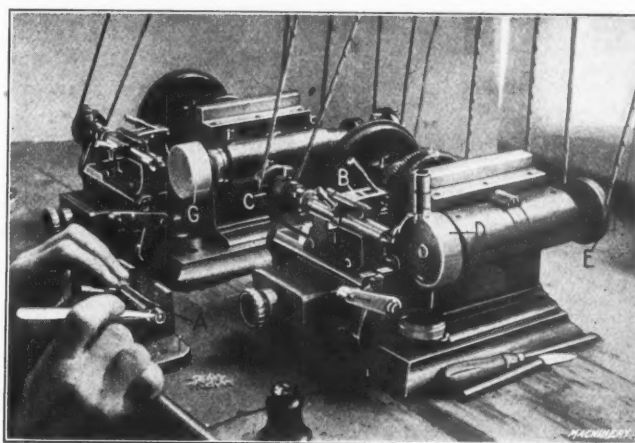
McGinty Staff Cone Grinding and Polishing Machine
